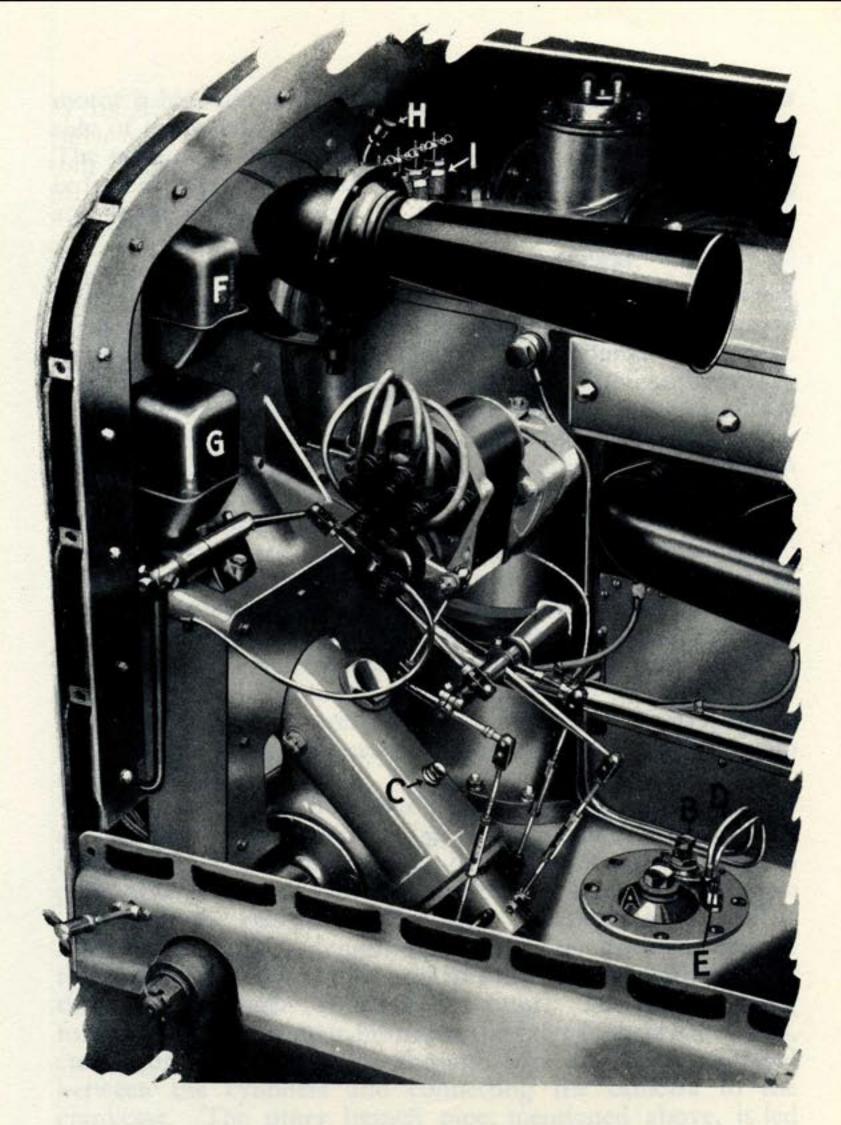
CARBURETTOR CONTROLS, OIL FILTER AND PRESSURE ADJUSTING PLUG.
